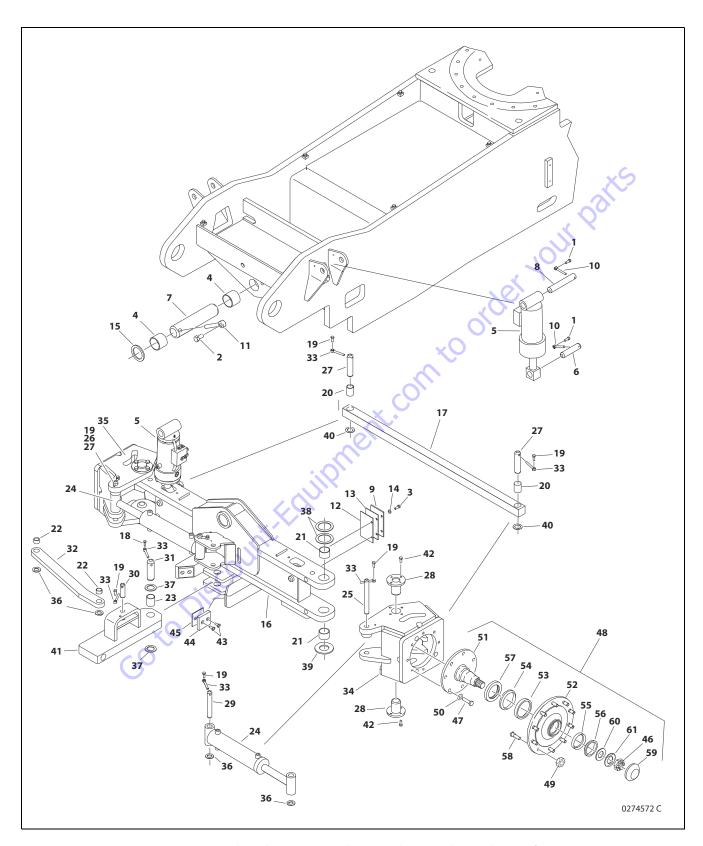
Axle and Steering Installation with Tow Package- Sheet 1 of 2
